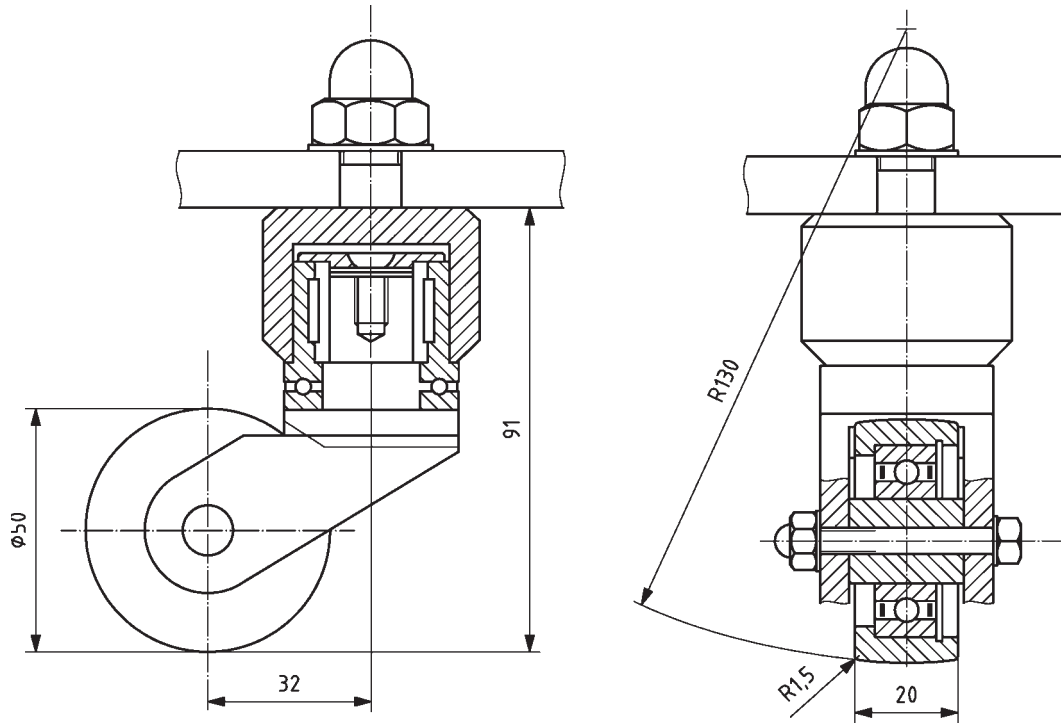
Single-wheel swivel castors (nominal dimensions in mm)
